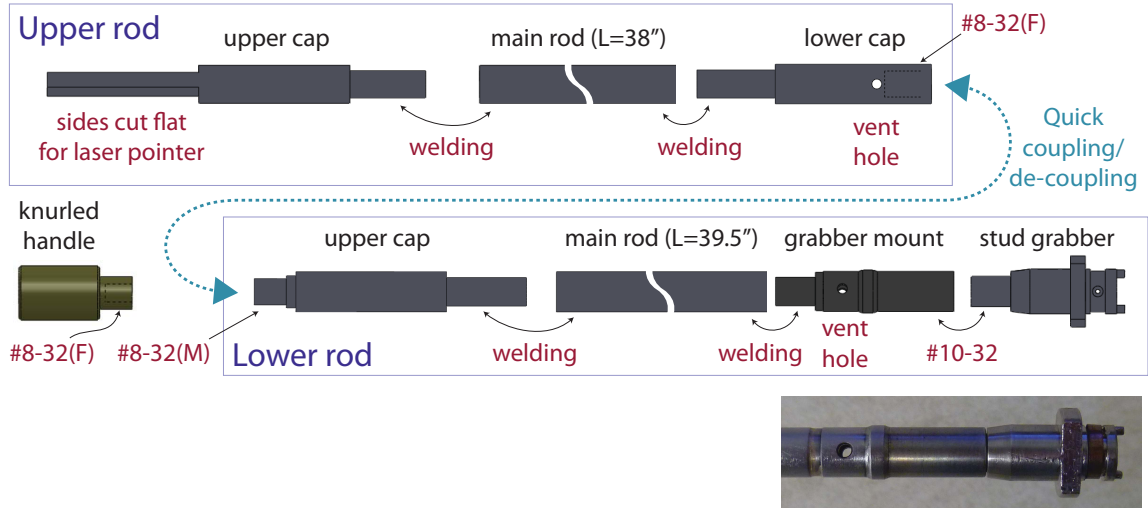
New sample transfer rod. Parts in two boxes are assembled in one pieces (upper / lower rod). During sample transfer, the two rods are coupled and decoupled easily with threaded joint. At the bottom is the actual image of the bottom portion of the lower rod. The knurled handle is fastened to the lower rod when only the lower rod is inserted, for convenient handling and slip-loss prevention.
